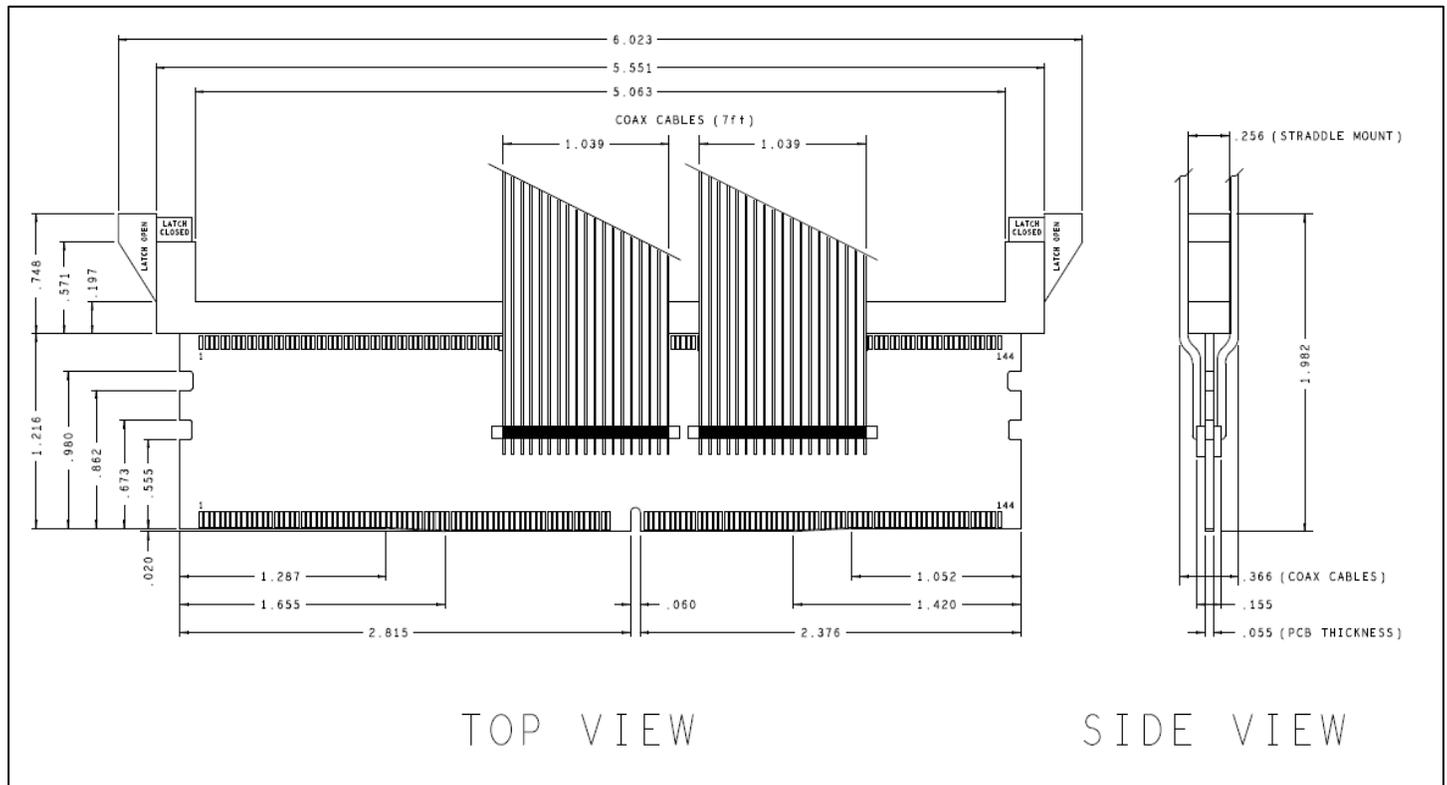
DD4-D-DIM-288 Interposer Dimensions
